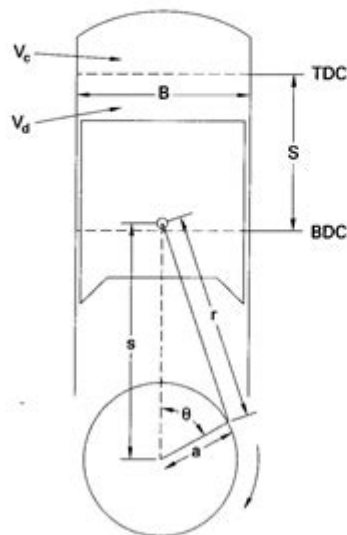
Piston and cylinder geometry of reciprocating engine. B = bore; S = stroke; r = connecting rod length; a = crank offset; s = piston position; θ = crank angle; V_c = clearance volume; V_d = displacement volume.
